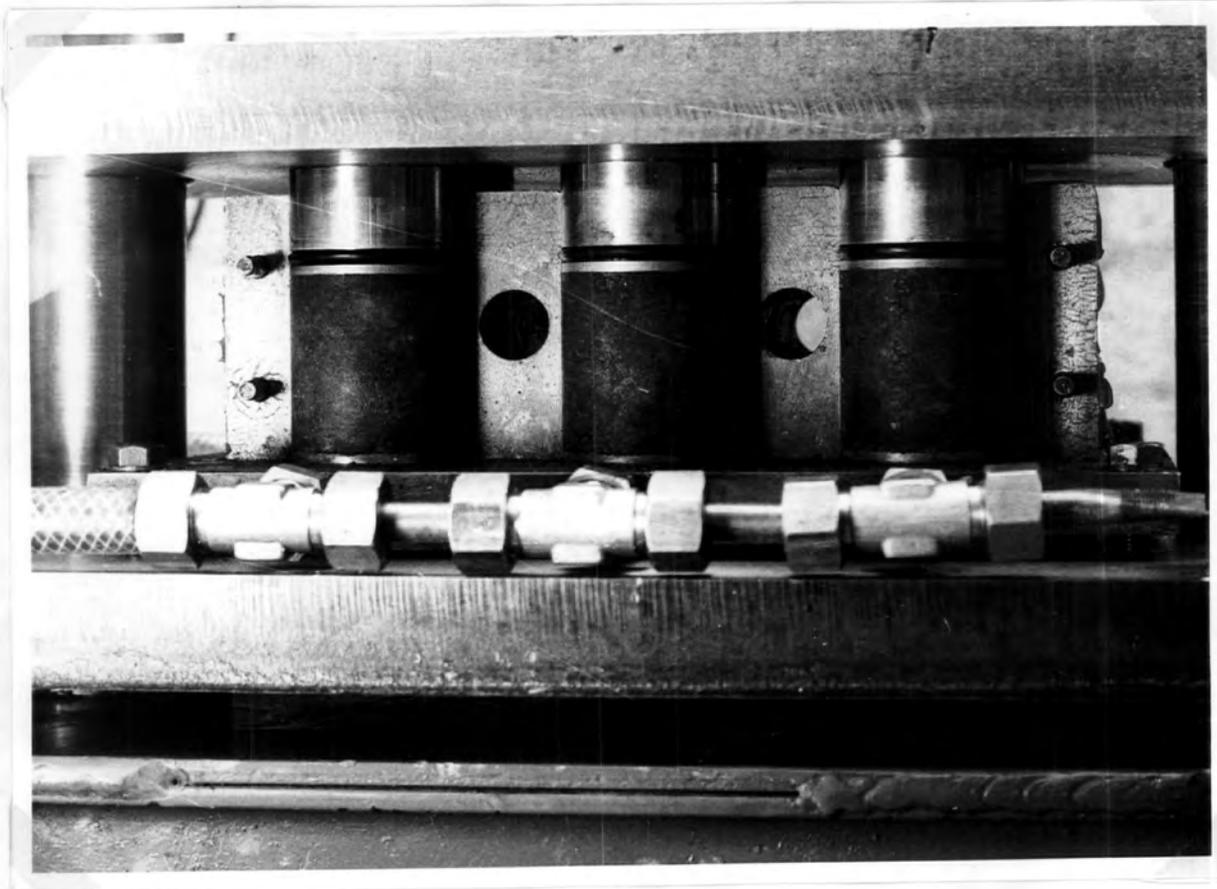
PARTLY DISMANTLED APPARATUS AND RESULTING PROCESSED SPECIMENS.
